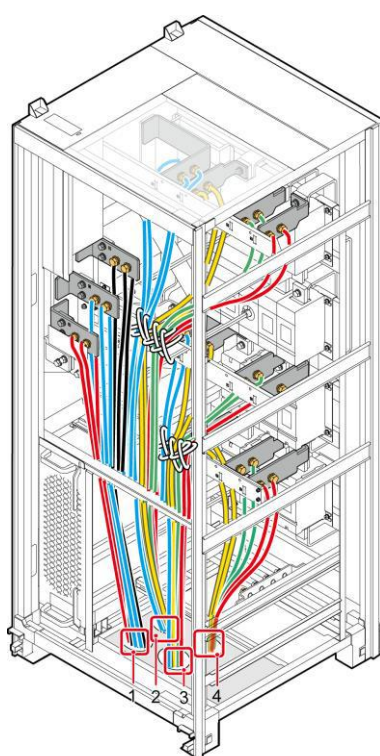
Routing power cables from the bottom of the cabinet (300 kVA bottom cable entry)
